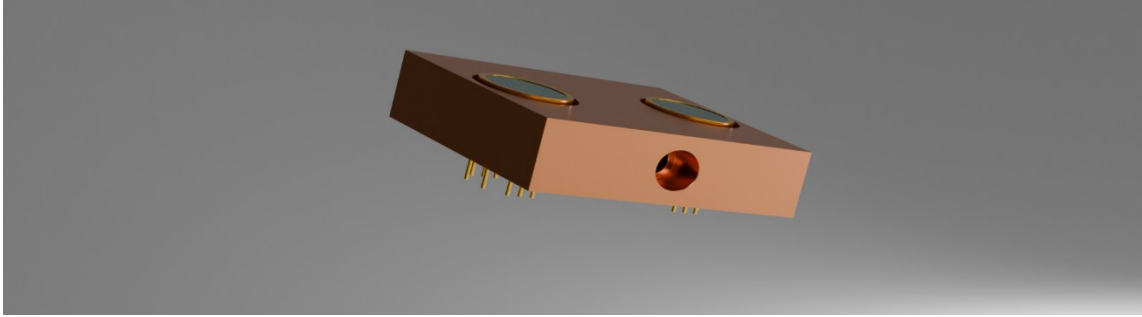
3D photorealistic render of heatsink copper block & photodiode assembly
